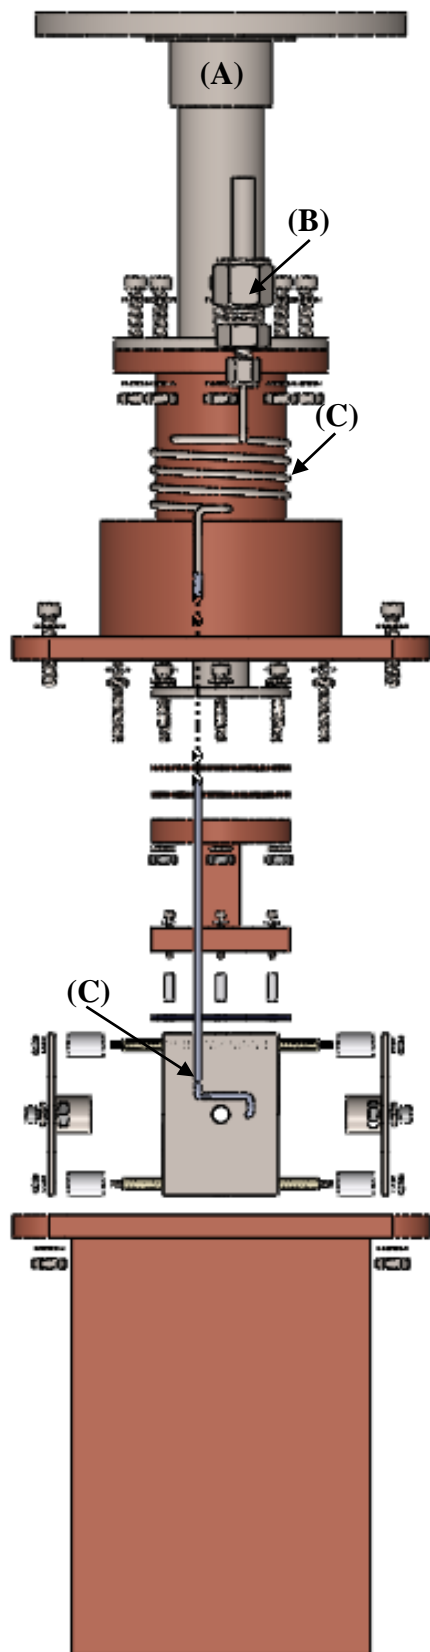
Exploded view of entire QIT and shielding assembly mounted to the arm of the cold head. Drawn to scale. The temperature sensor was wedged between the top portion of the outer shielding and one of the 6-32 hex nuts that assisted in mounting the top piece to the first stage of the cold head. (A) Cold head arm. (B) Yor-Lok adapter. (C) Buffer gas tubing.
